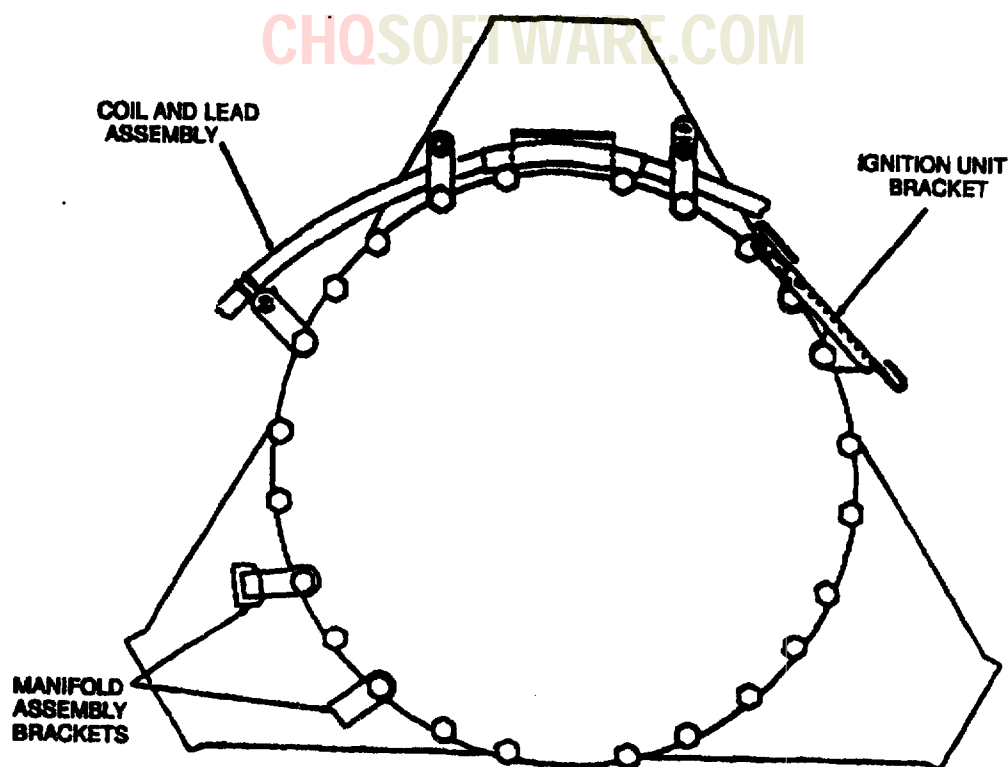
Mounting Bracket Locations (T53-L-13B, -703).
